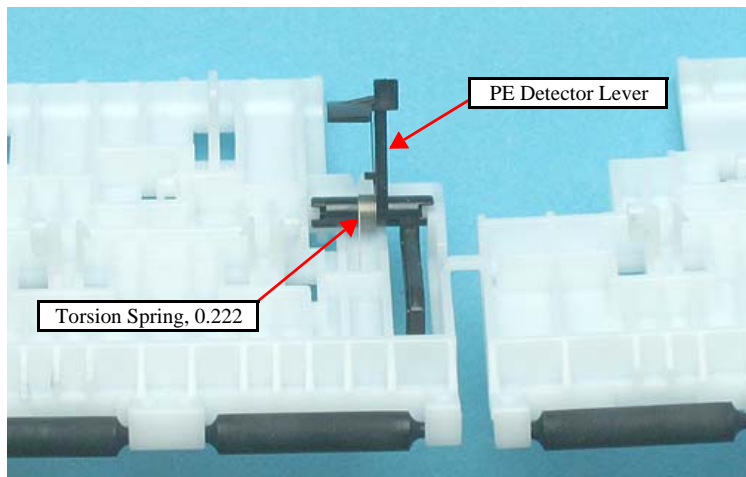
Removing PE Detector and Torsion Spring, 0.222
